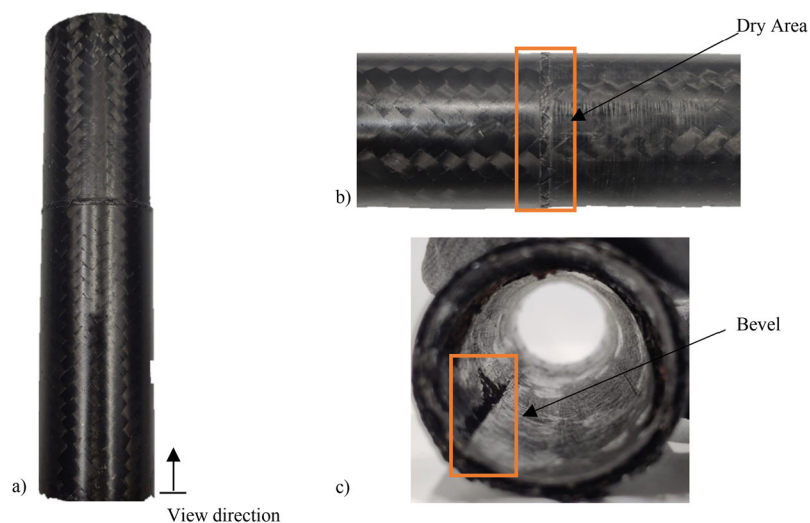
Overall view of the manufactured straight profile (a); Close-up of the dry area at the sealing point (b); View of the inner part of the profile (c).
